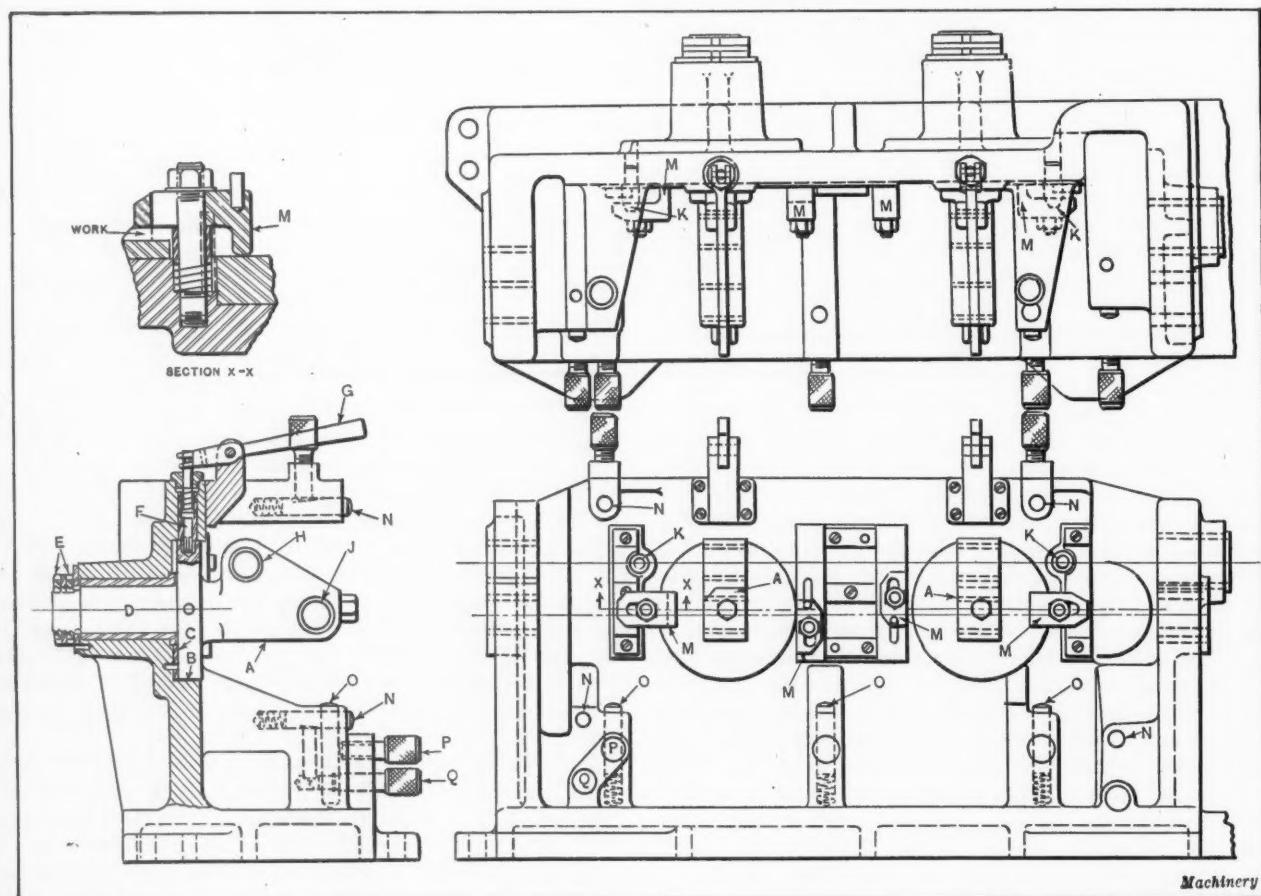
Construction of Jig employed in finish-boring the Camshaft and Crankshaft Bearings of a Cast-iron Crankcase
